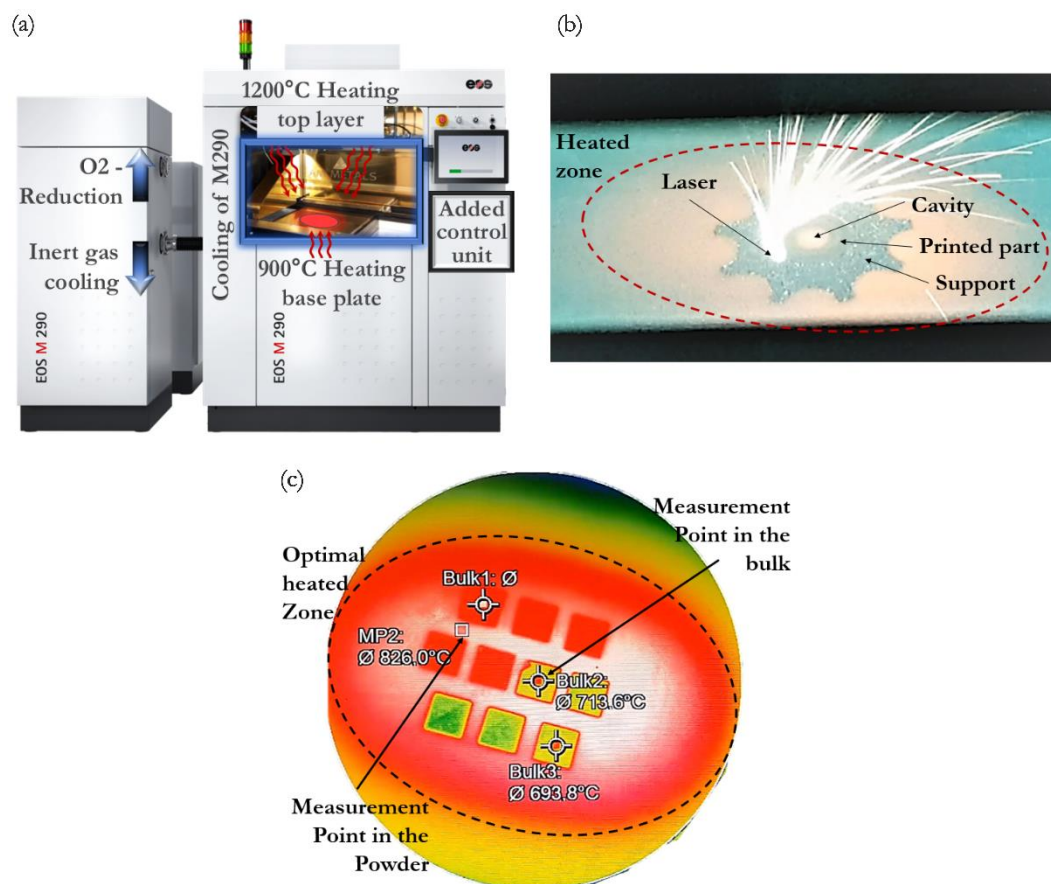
(a) EOS-M290-HT system with base plate heating up to 900 °C; the uppermost powder bed layer can be heated up to 1200 °C; cooling system of the machine using inert gas; gas purification system for O₂-level <200 m. ppm; additional control unit, sensors, IR camera and data logging; for further details, see text; (b) heated zone in the process chamber of the EOS-M290-HT, the manufactured turbocharger turbine wheel has a diameter of ~40 mm; (c) analyzed IR camera data in the heated zone of the EOS-M290-HT. The squares have a side length of 10 mm.
